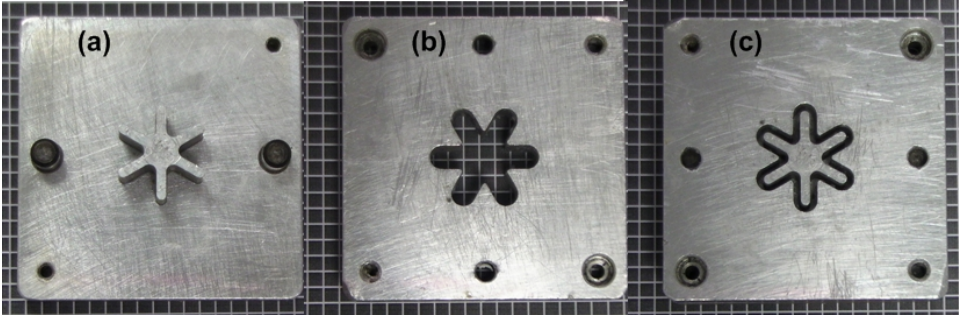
Images of star-shaped mold. (a) Bottom part, (b) top part, (c) assembled.
